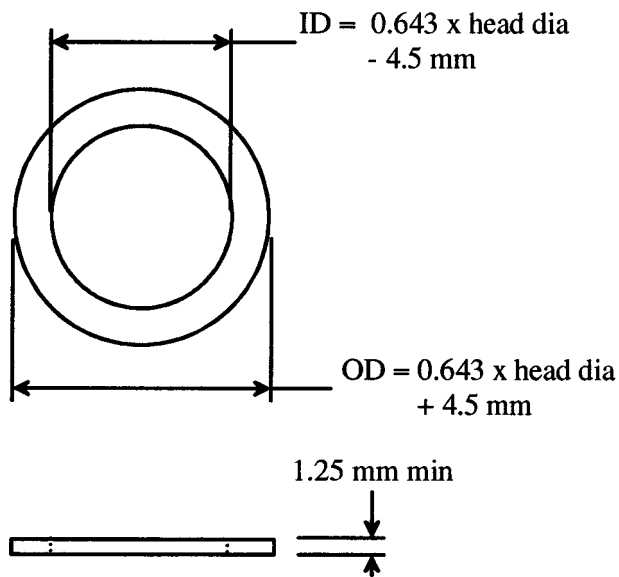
Copper Ring for Use in Ceramic Head Tests
